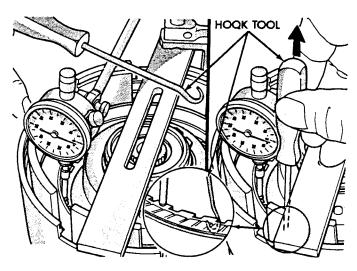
Use Hook Tool to Raise One Clutch Disc
